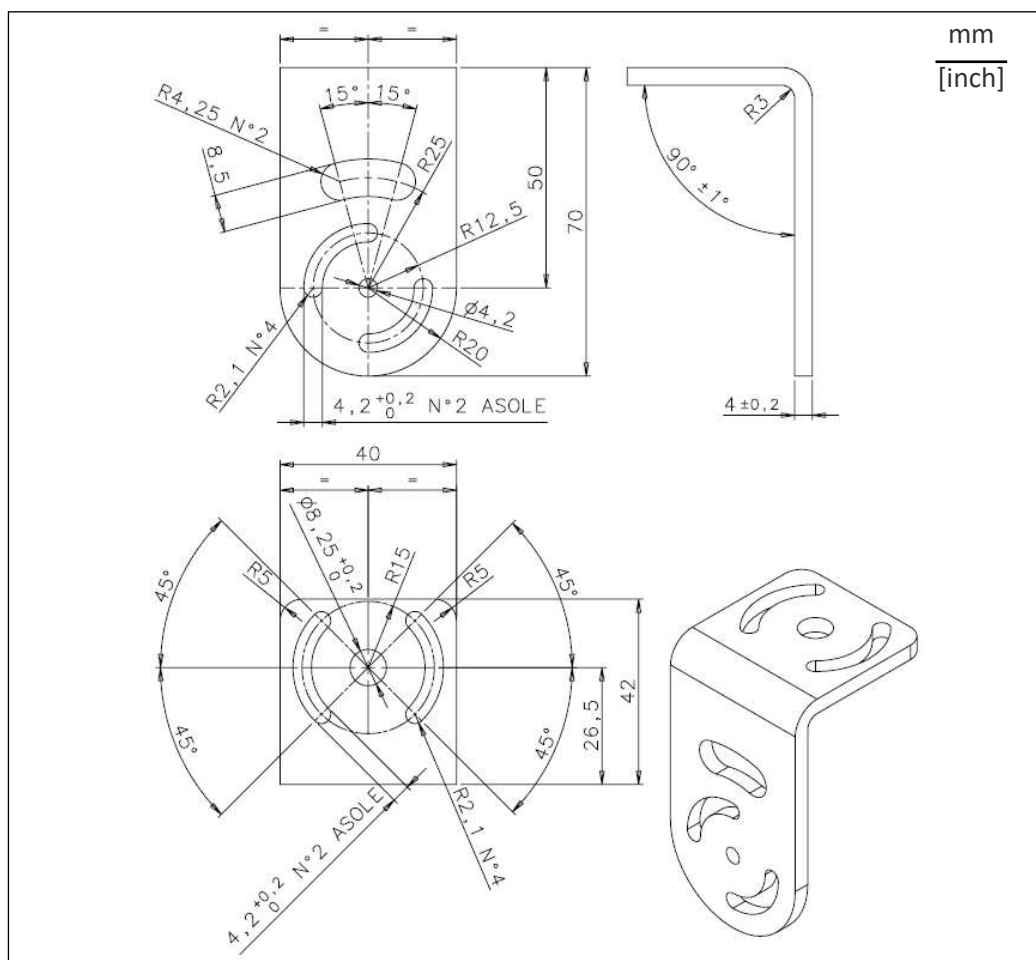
Overall Dimensions: BK-32-000 Standard Fix Bracket for Matrix 320 with 14 LEDs illuminator
